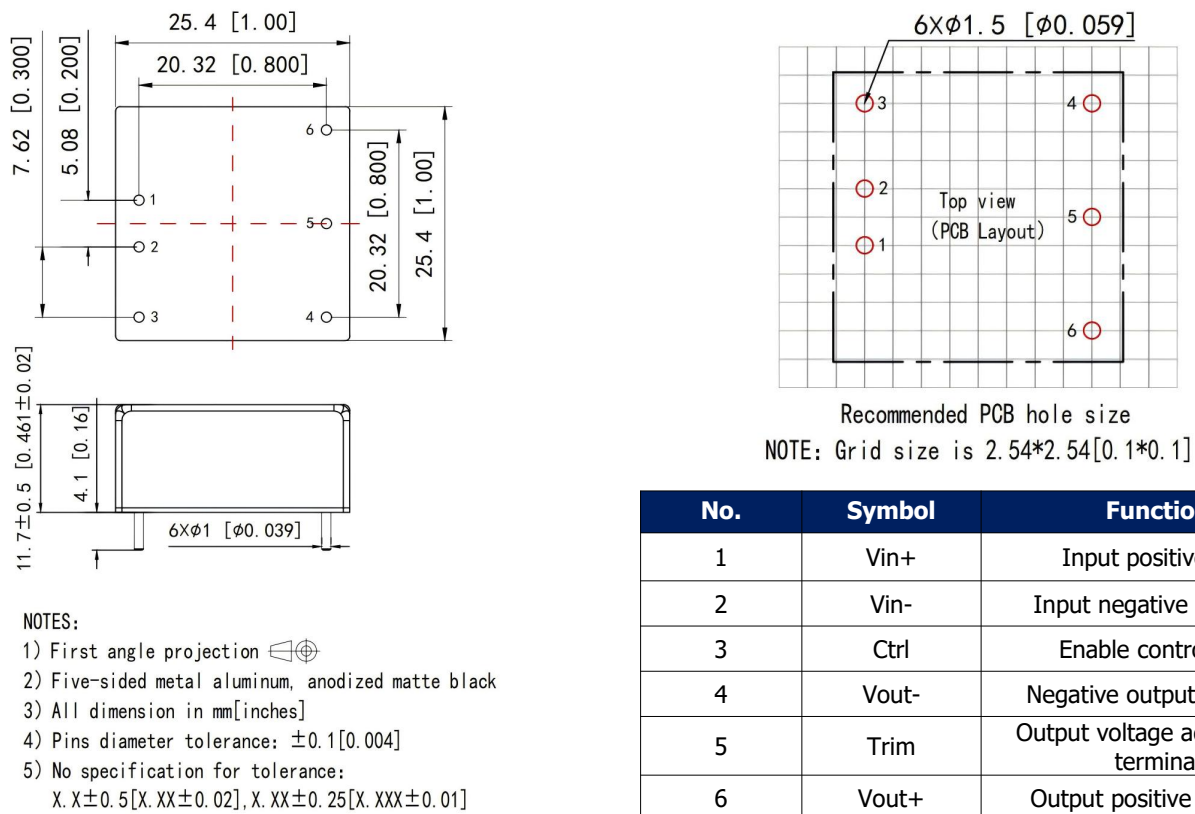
Terminal Arrangement (Top View, Pin Up) and Appearance Dimension
